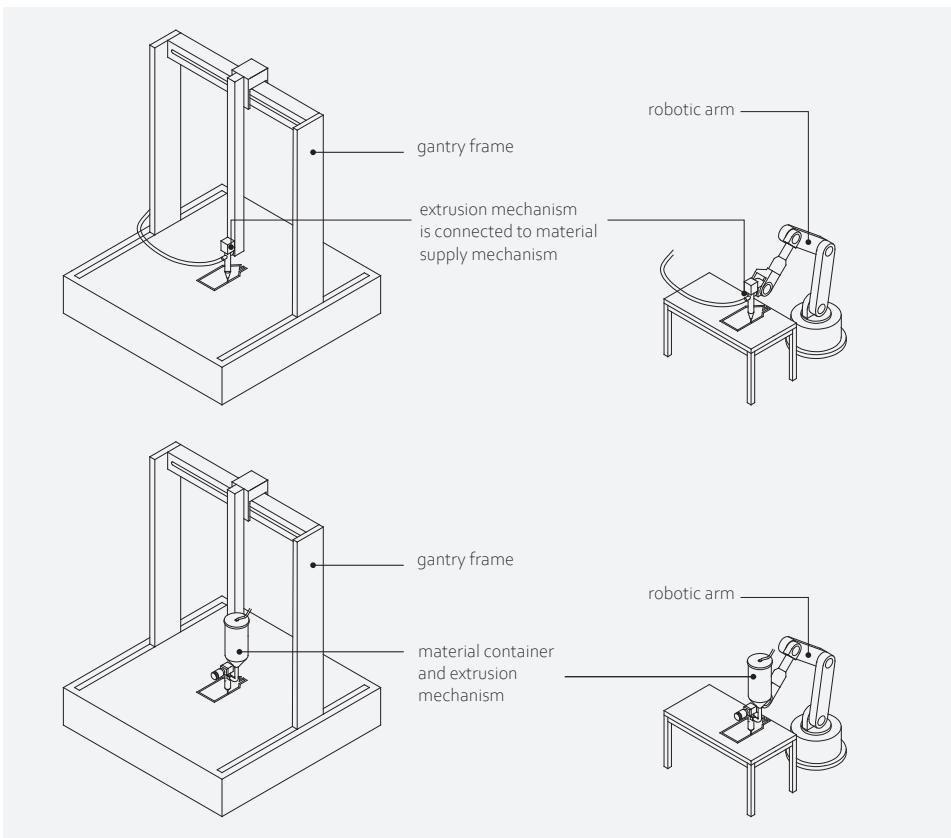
Tool layout of manipulator, continuous and badge extrusion
